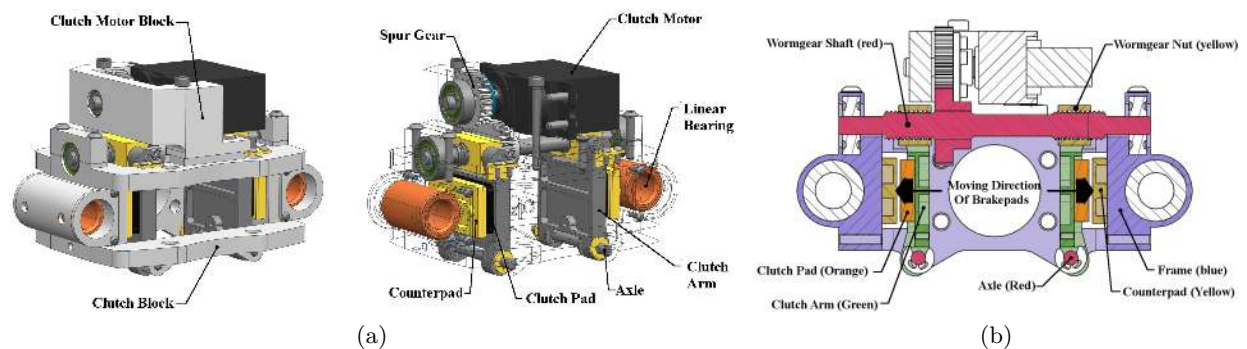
(a) CAD assembly showing different components of the coupling mechanism with and without the housing to illustrate the braking mechanism. (b) Cross section of the coupling mechanism.
